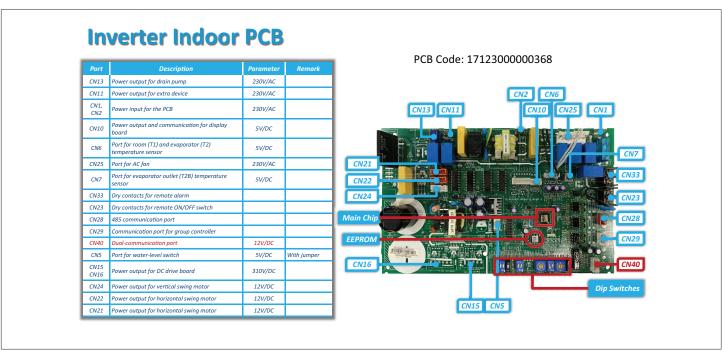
Typical Component Locations (MCFA Ceiling / Floor Indoor)
